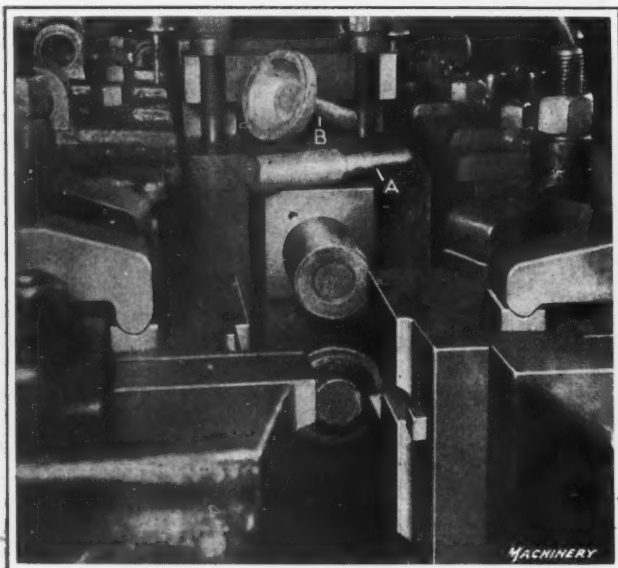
Tubular Shafts forged to Shape in Two Operations on a Bolt-header
